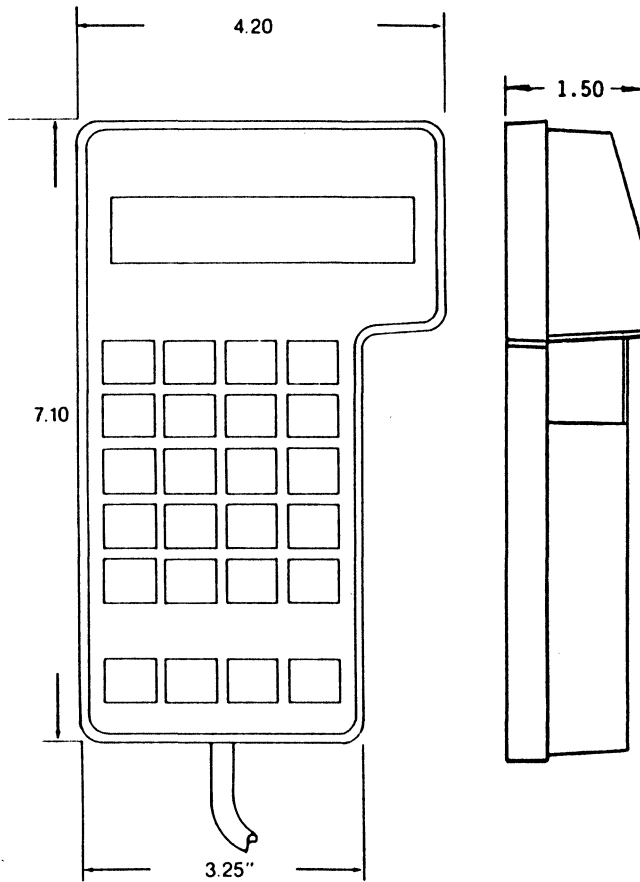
HT/40 Outline Drawing (All dimensions in inches).
